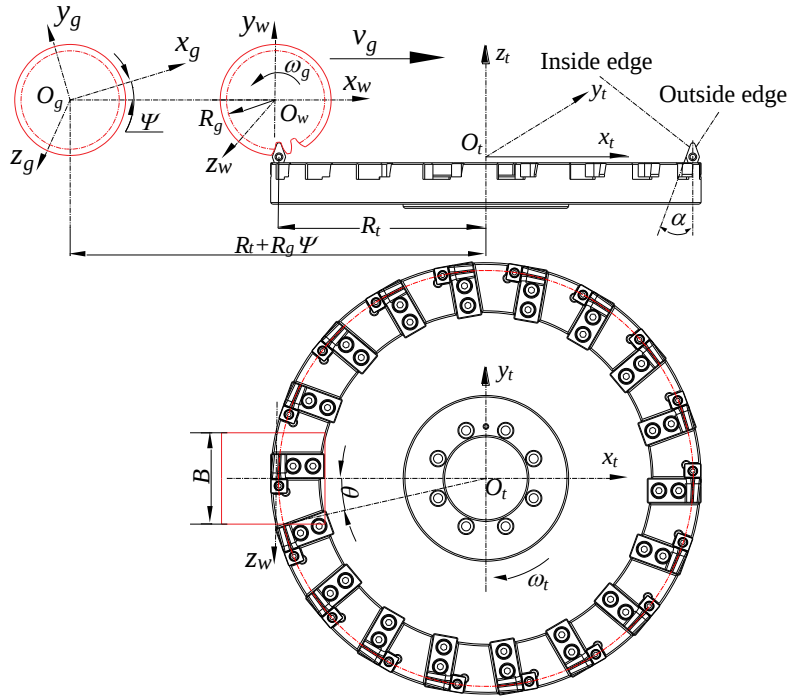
Machining Principle and Coordinate Systems of the C2CATT Gear.
